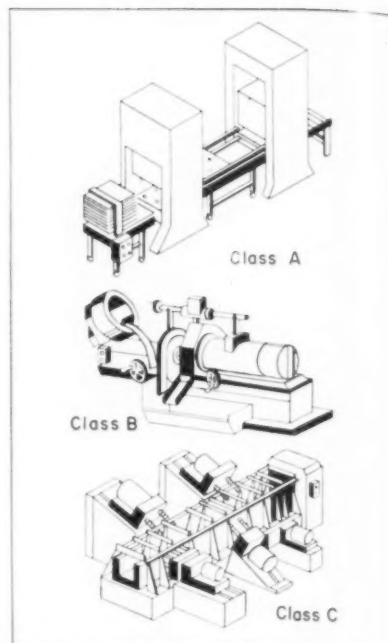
Classification of automation equipment: (a) standard machines with transfer equipment added; (b) standard machines equipped with transfer mechanism; (c) special machines using standard components.
